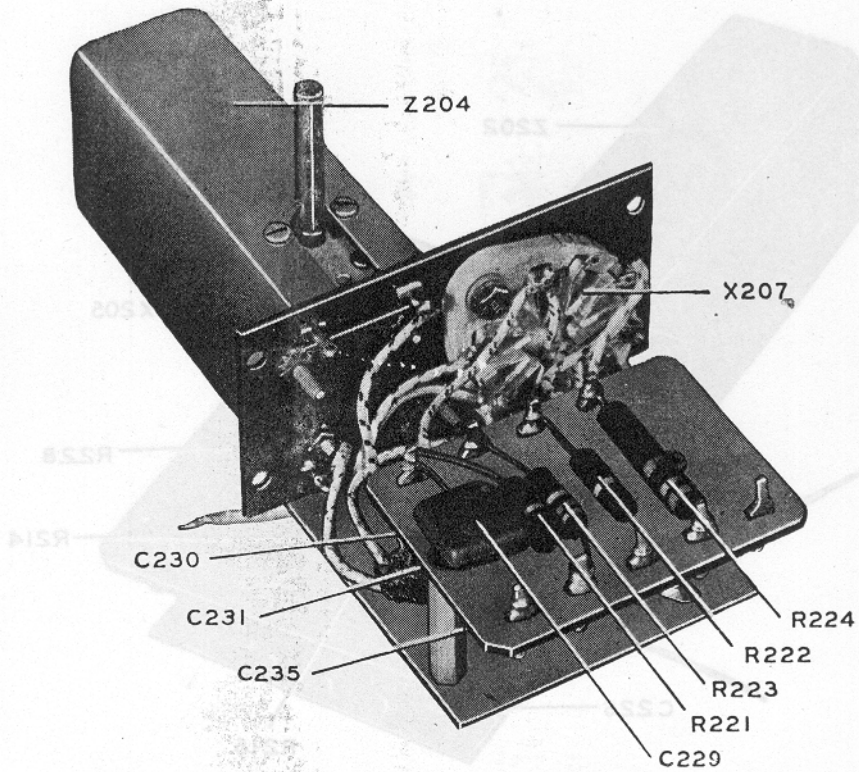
Receiver BFO and Audio Amp. Assembly—Bottom View
